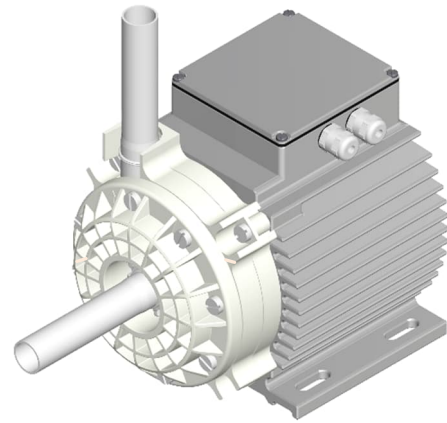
Maglev motor with sealless (welded) "Hybrid" pump head
